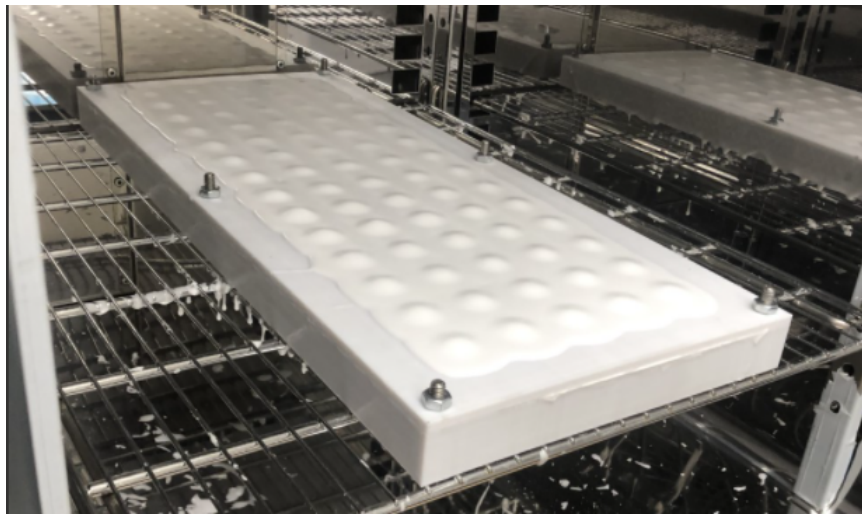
A larger mold included a bolted design that allowed the perimeter to be tightened more evenly.
